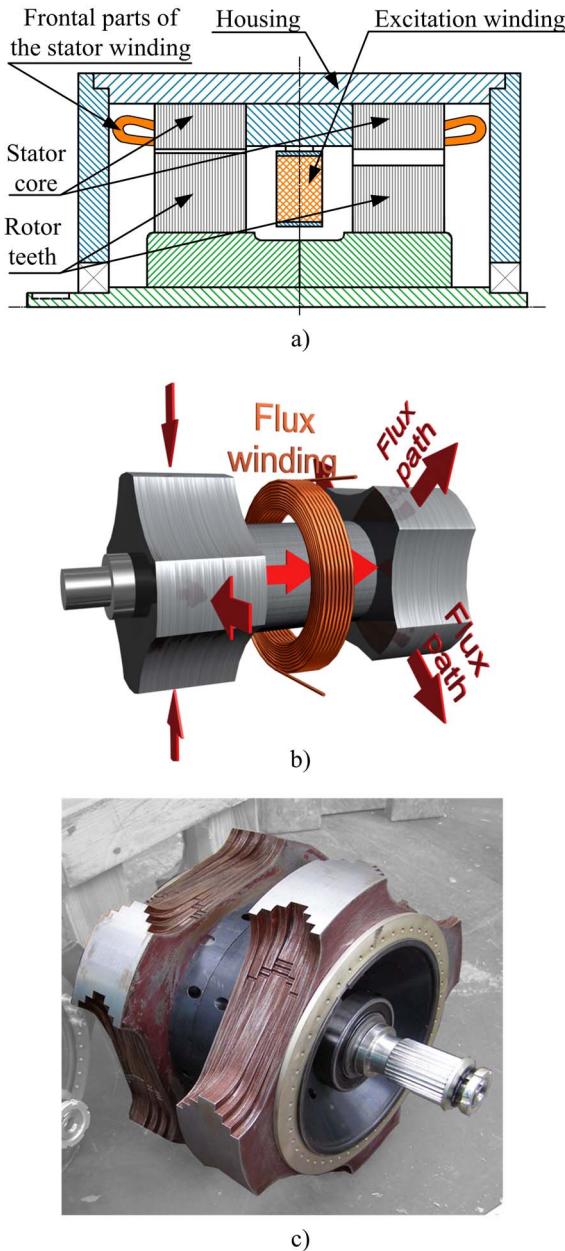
Homopolar motor: a — design with buried excitation winding; b — simplified explanation of rotor design, c — rotor of a real motor.
